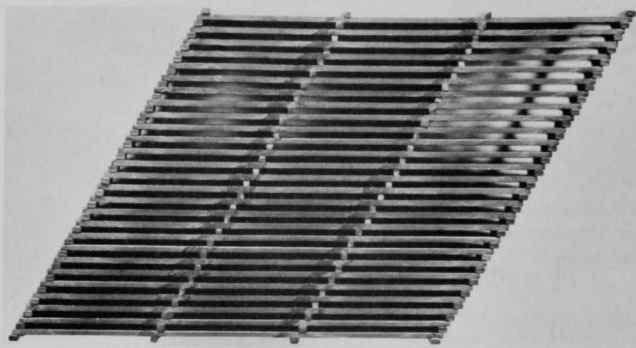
End View of Assembly S/N 327-6 with Double Center Spacer Wires
